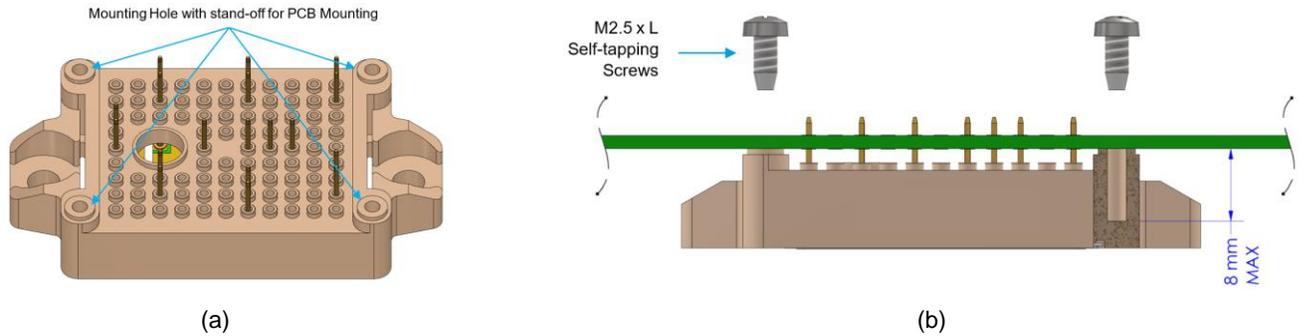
PCB mounting on E1B module (a) E1B PCB mounting hole with standoff, and (b) Maximum screw thread engagement depth.
